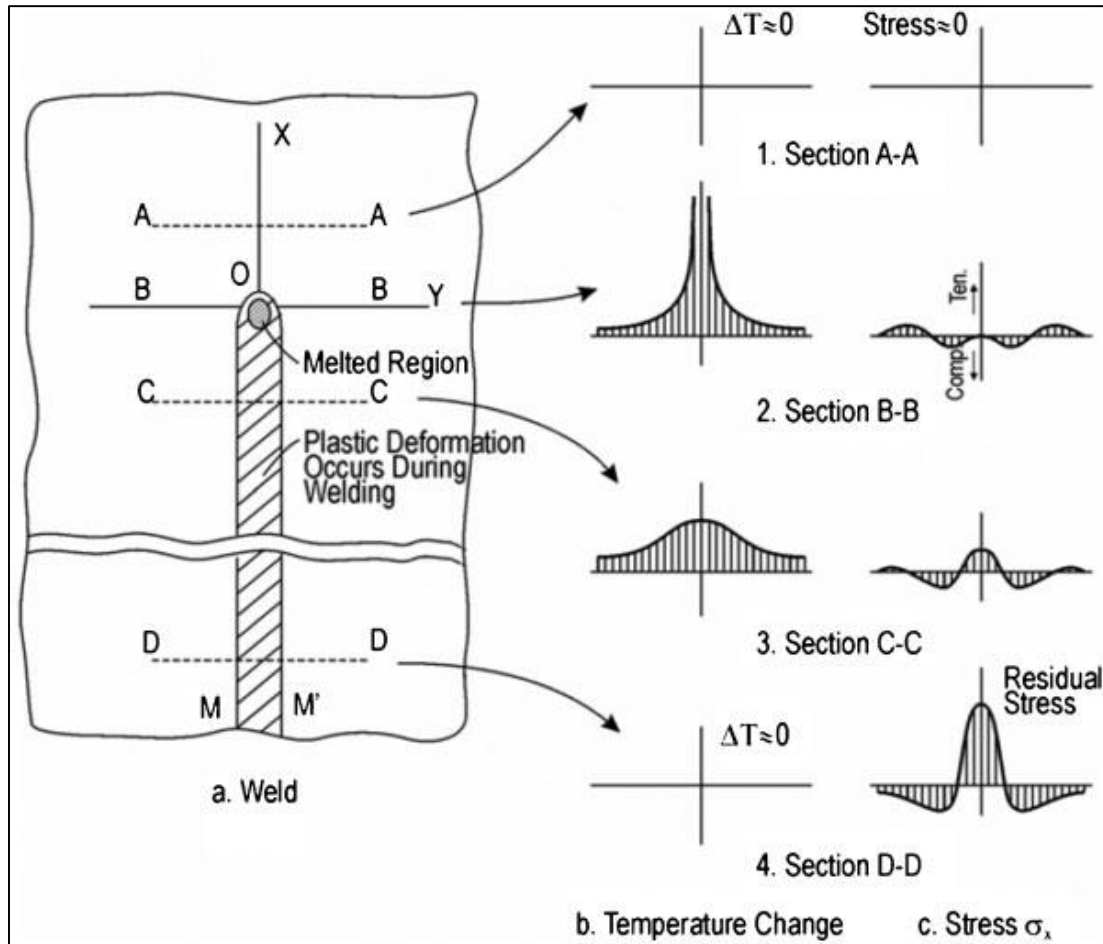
Showing residual stress formation in a weld [10], [151]
